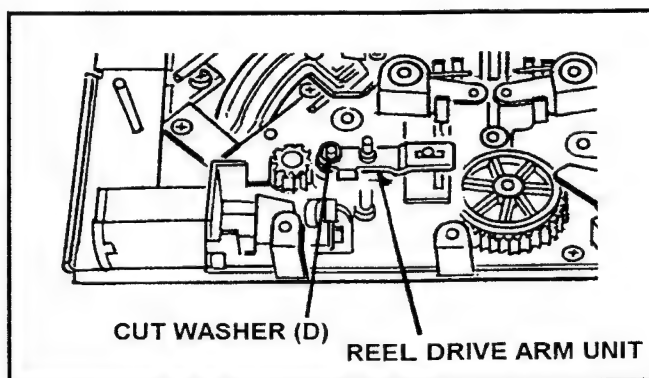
Removal of Reel Drive Arm Unit
